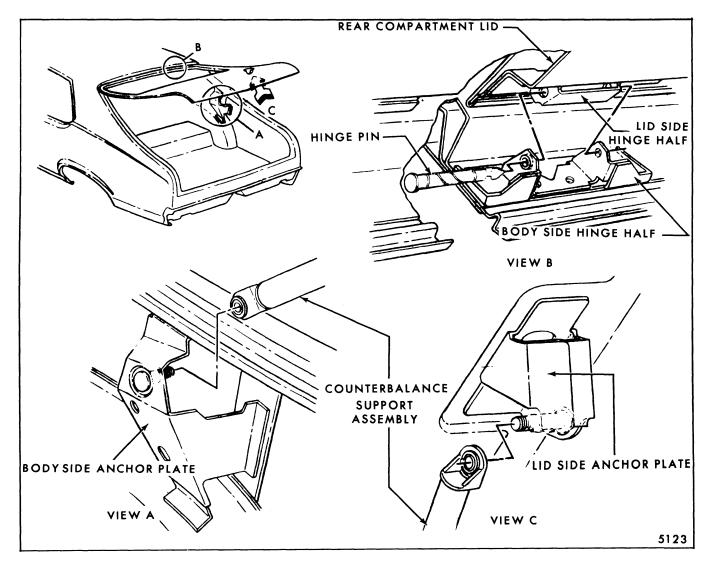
Counterbalance Support Assembly Attachment - "X-17" Style Only
